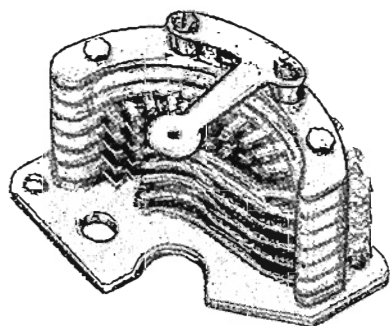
Typical bank assembly of wiper and bank parts (compact rotary stepping switch).
